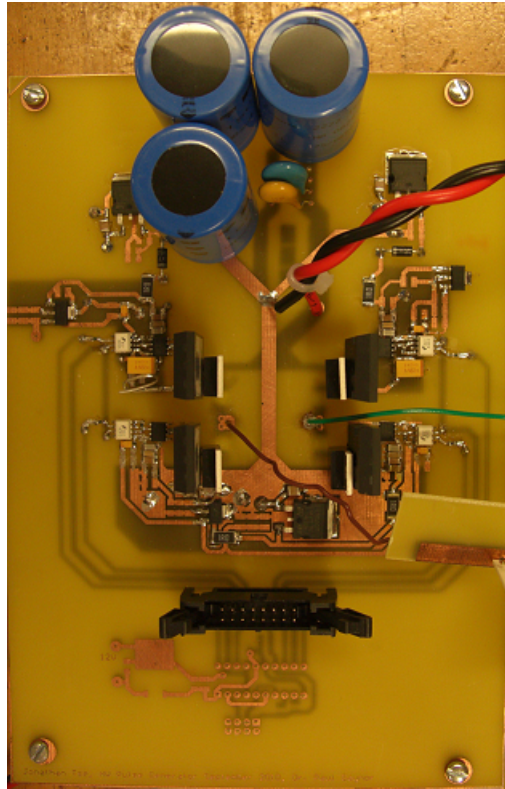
Final layout and construction of the high-voltage stage PCB
